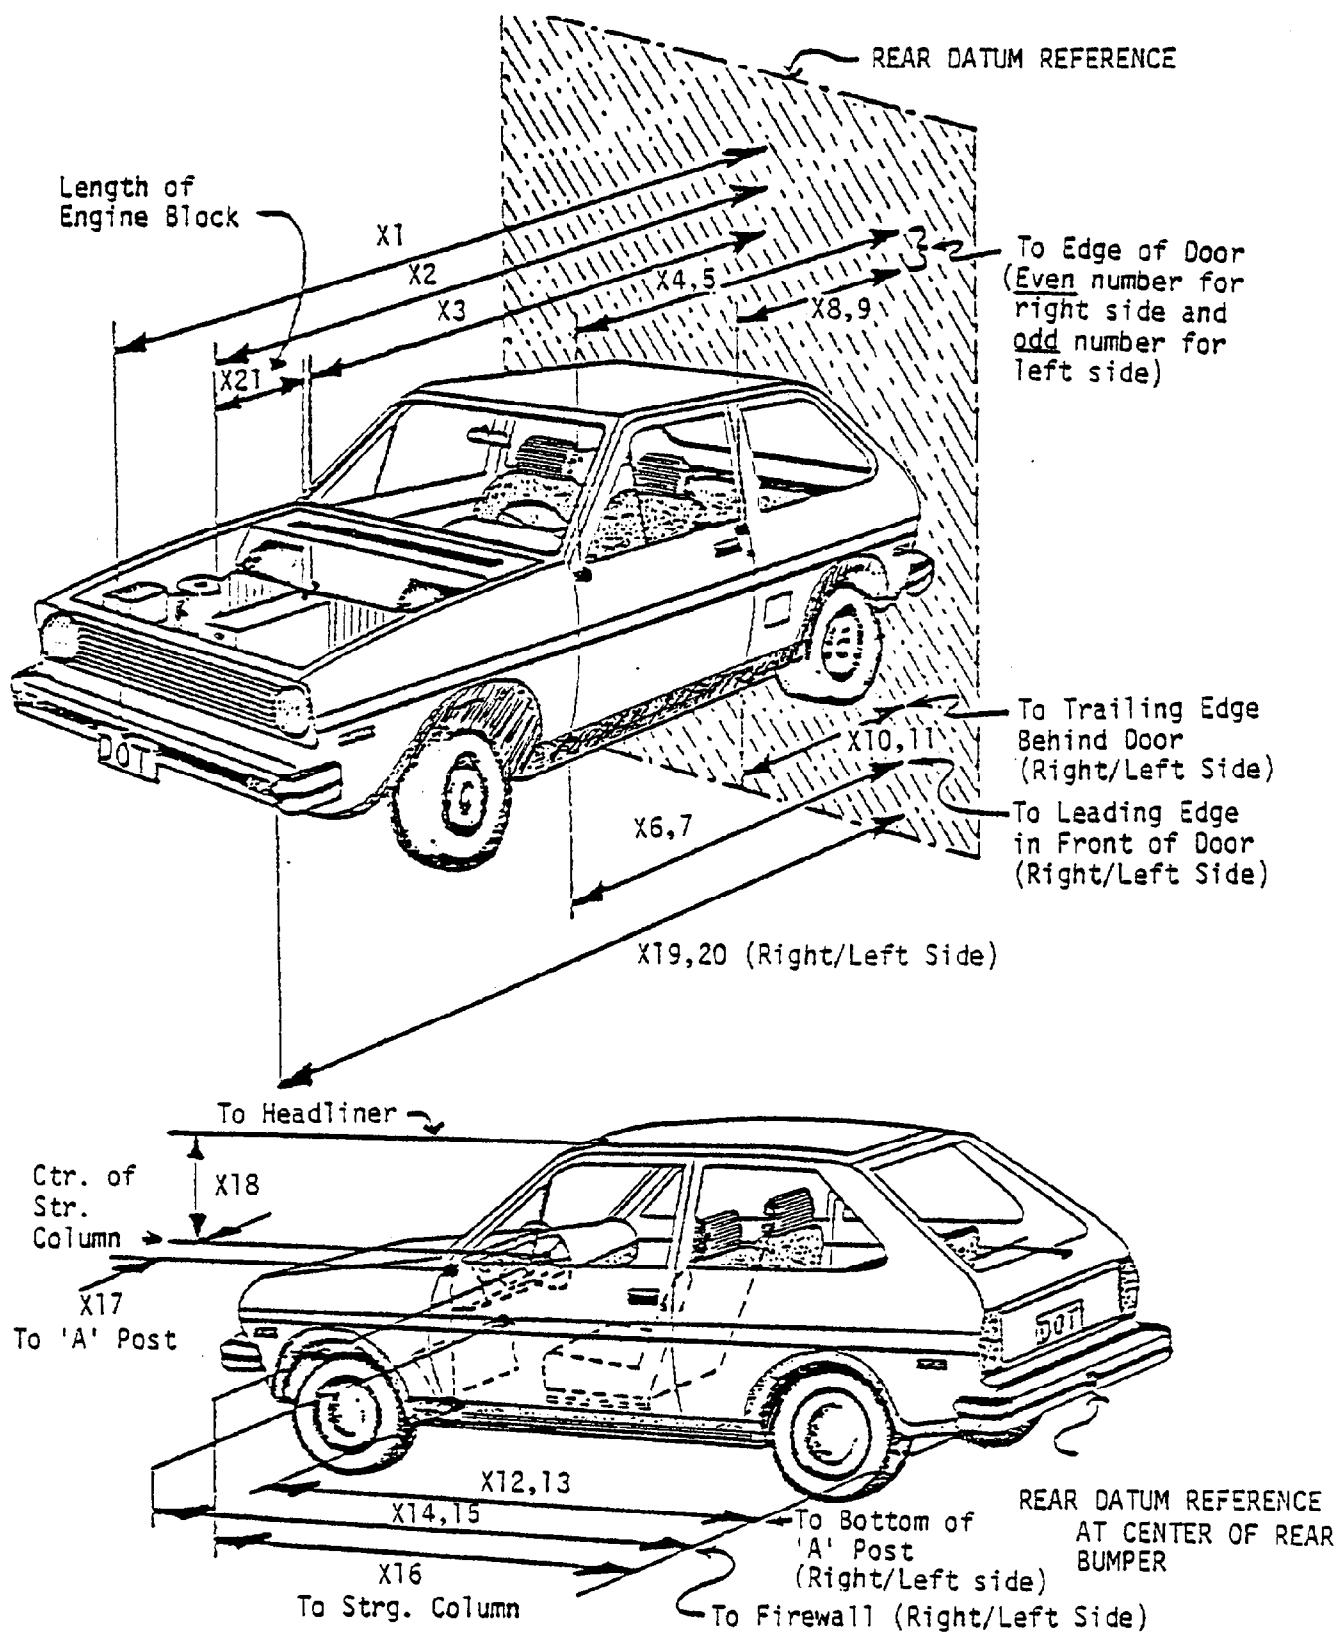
PRE-TEST AND POST-TEST MEASUREMENT POINTS
